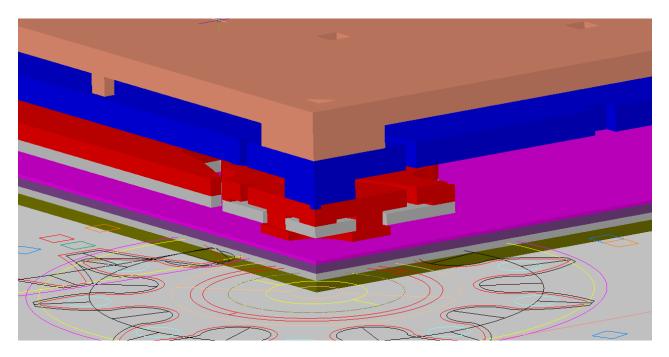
3D AutoCAD model of suspended moveable gear hub.
